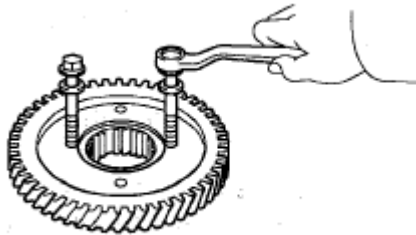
Removing Counter Drive Gear From Transaxle Case
